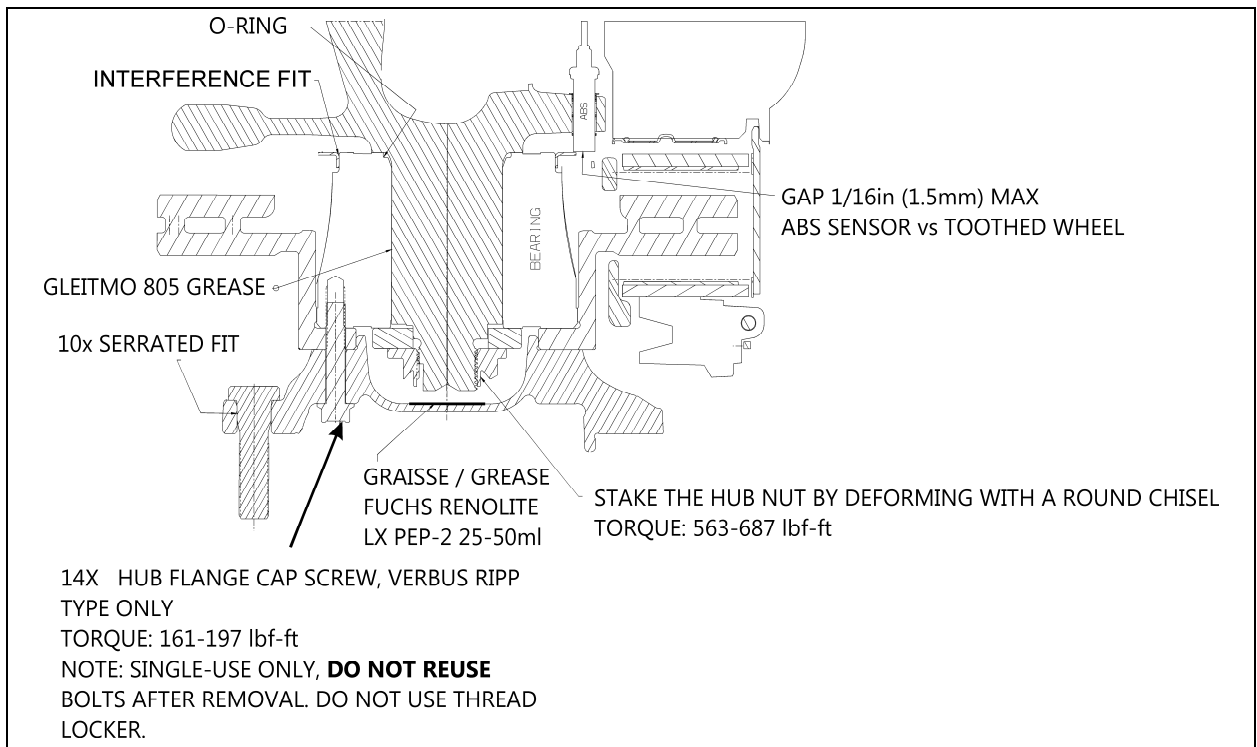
TAG AXLE UNITIZED BEARING & WHEEL HUB
